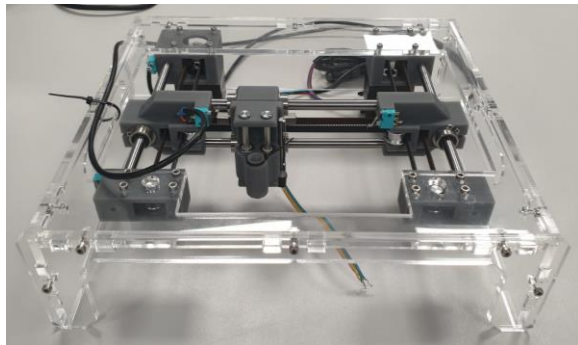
Partially assembled bespoke 3D printer for vacuum environment testing.
